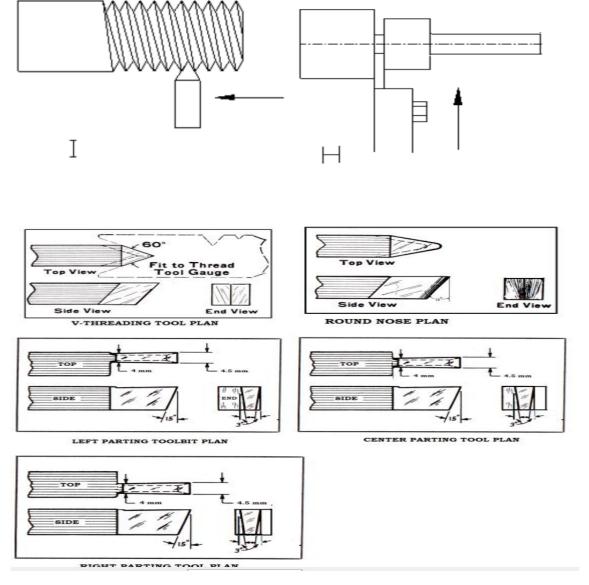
Figure H: shows a parting tool. Parting tools cut off the stock at a certain length. This tool requires a preformed blade and holder.
